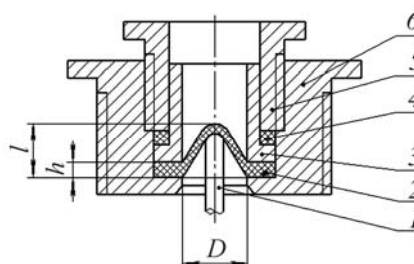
Scheme of a cell for attachment of the testing specimen: 1 – pin indenter, 2 – sample; 3 – clamping bush; 4 – plastic lining; 5 – clamping nut; 6 – cartridge clip.
